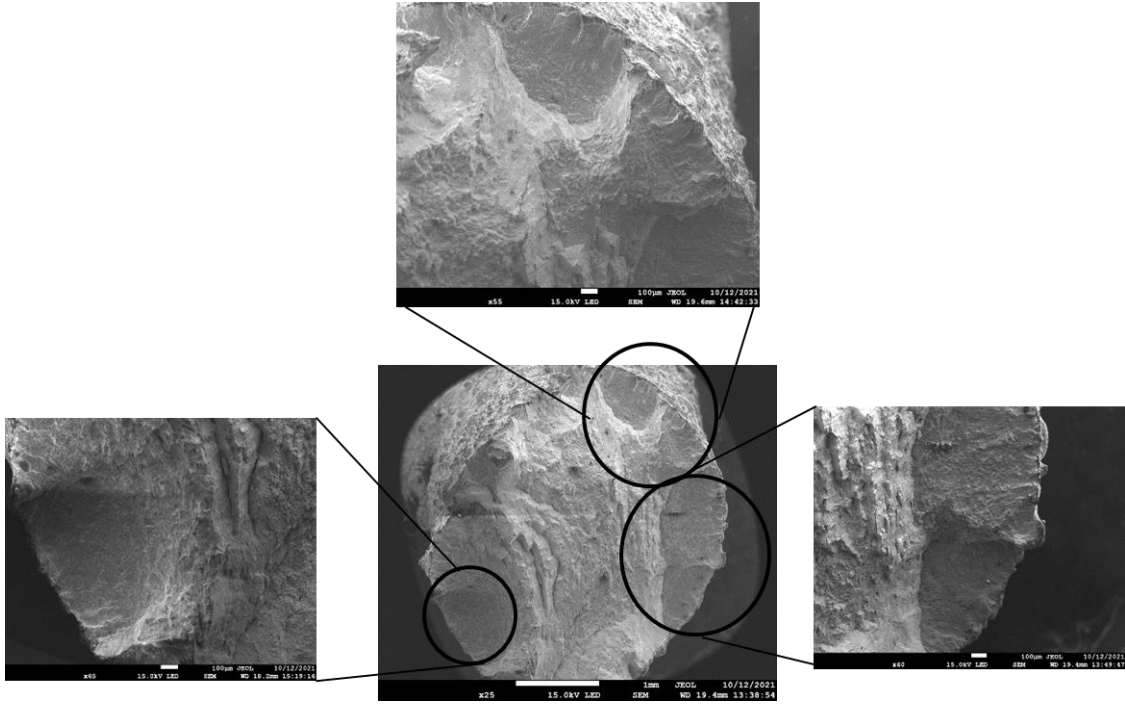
Fractography for fatigue sample 3 fabricated with 280 W.
